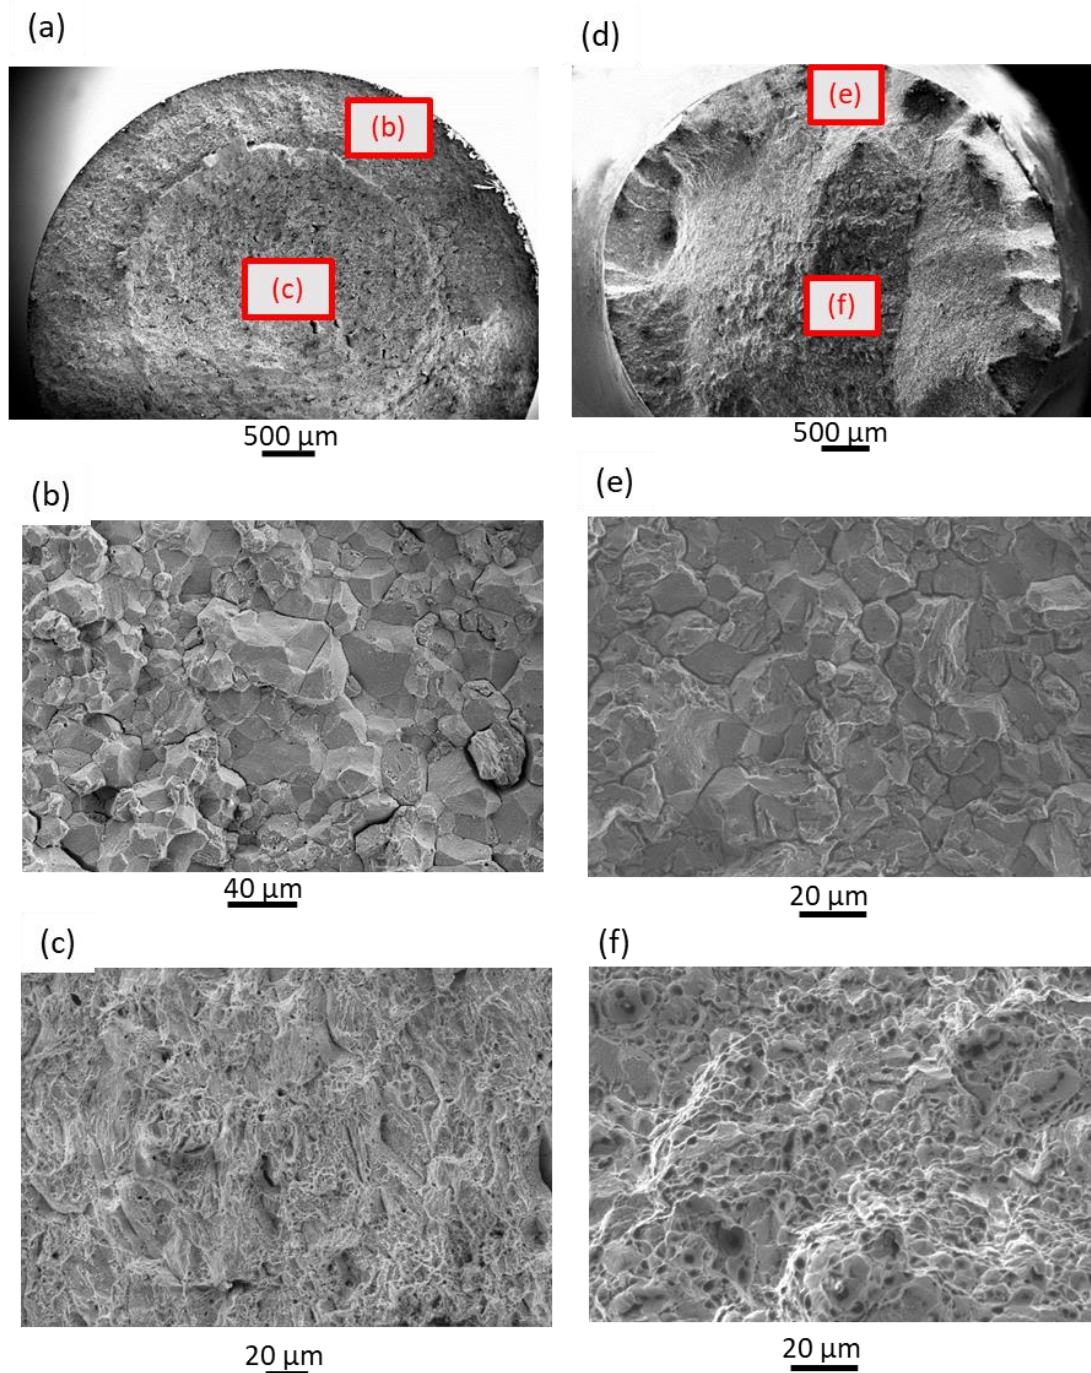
Fracture surfaces after tensile test for the polished specimens (a-c) and the ball-burnished specimens (d-f) for the H charged,  $10^{-4}$  mm/s condition.
